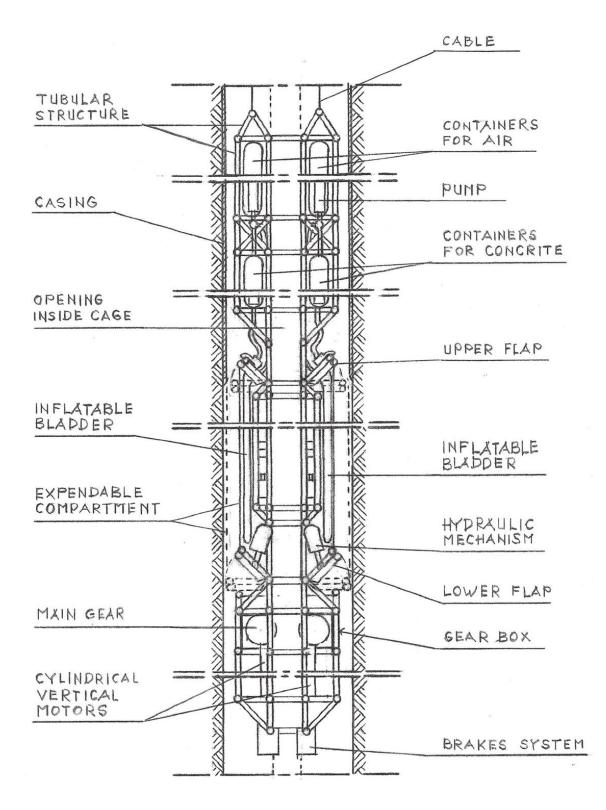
Cross-sectional View of an Circular Cage to be assembled on the Excavation Line of the apparatus for Drilling Faster, Deeper, and Wider Wellbore.
